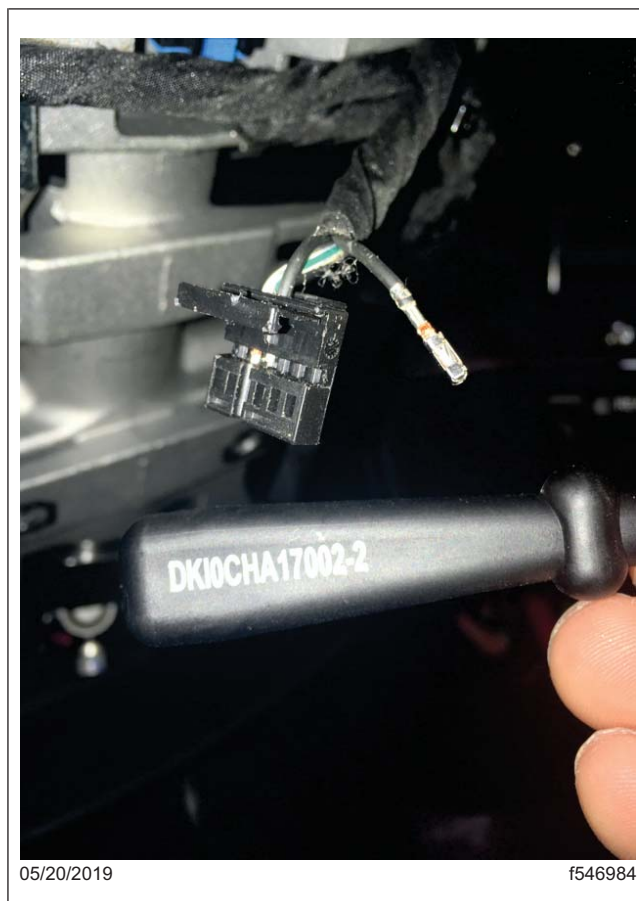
, Wire Removal Tool DDE DKIOCHA17002-2
